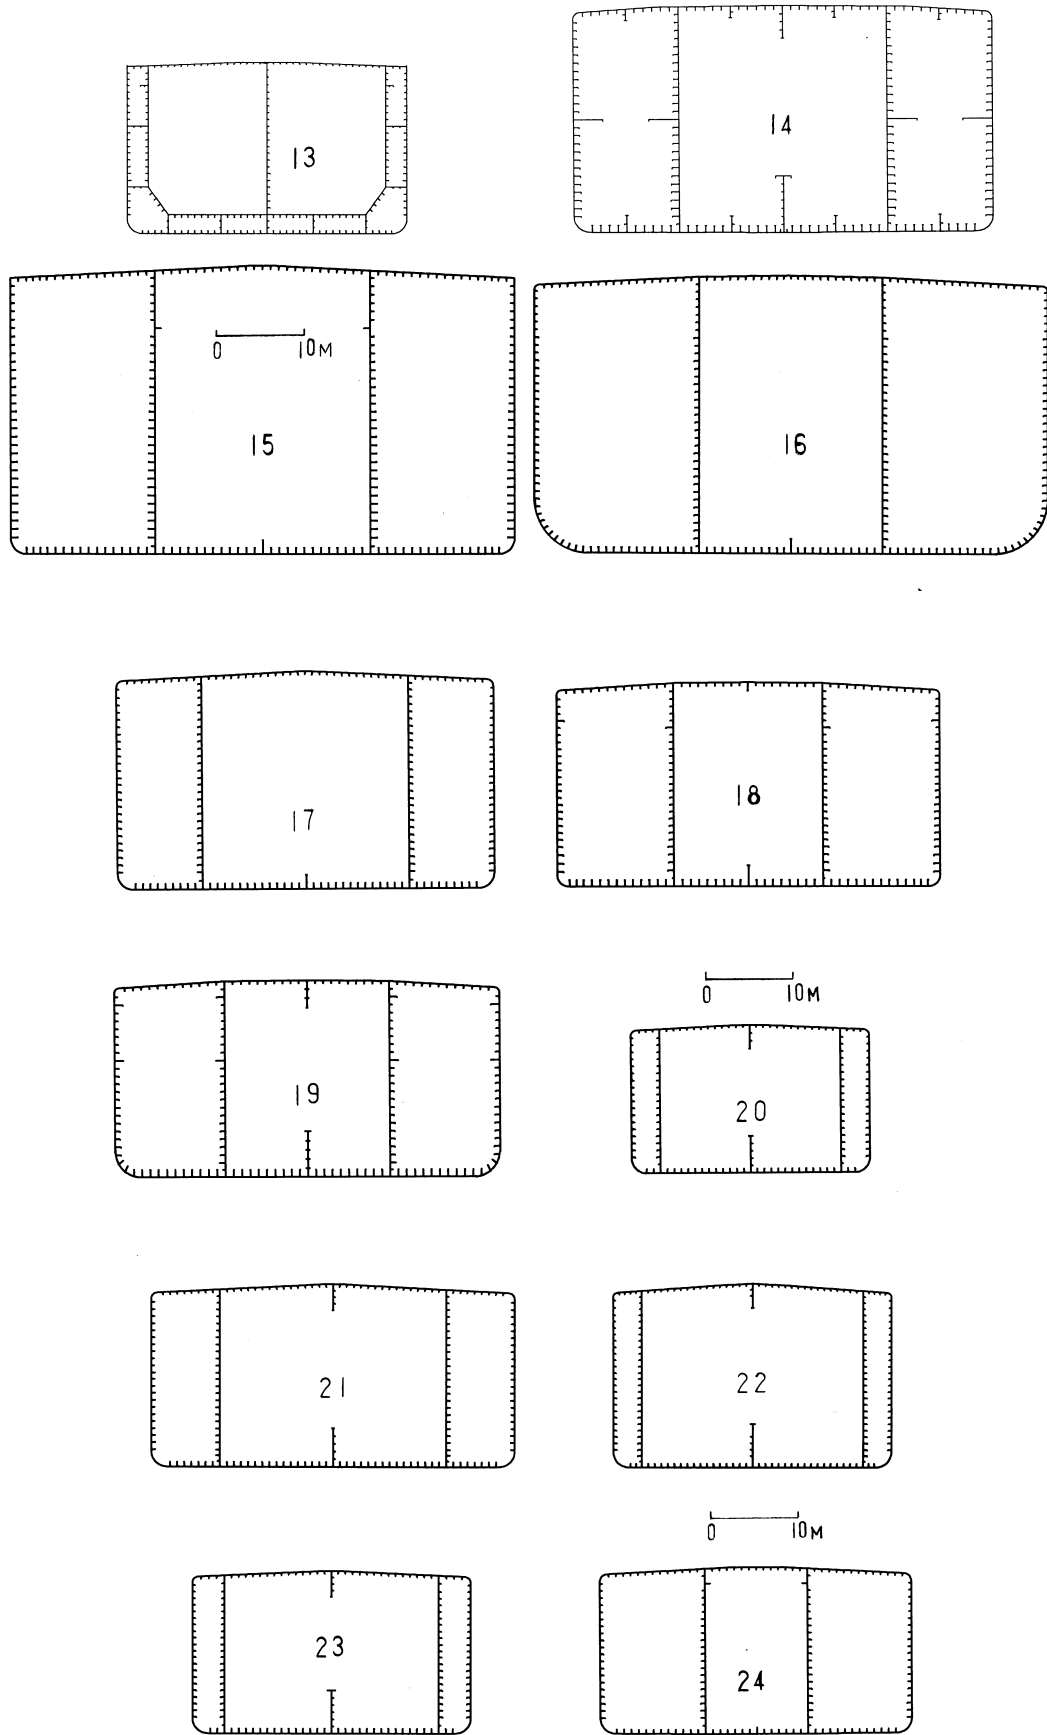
Hull girder cross-sections of Ships No.13 through 24
